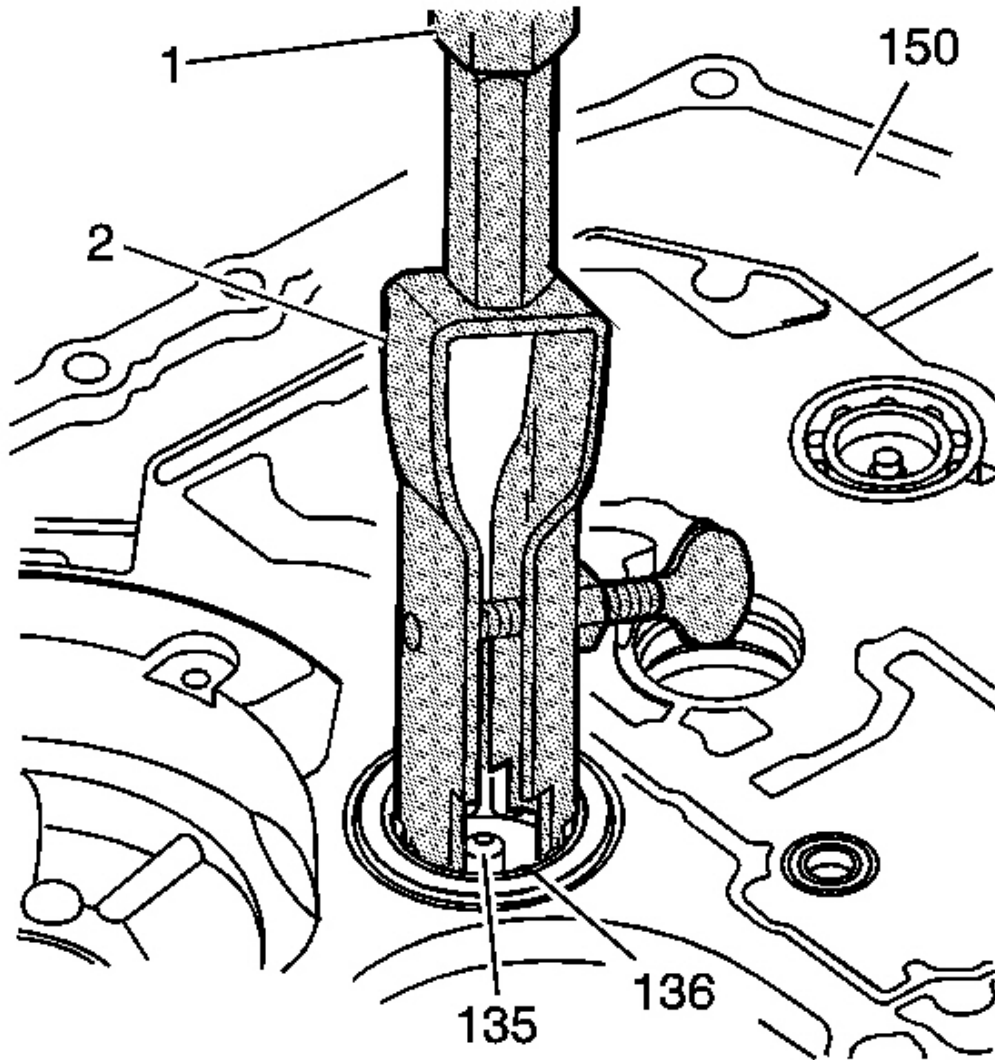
J 26941, SA9133T, SA9133T-1, Output Shaft Front Bearing & Lube Feed Plate
